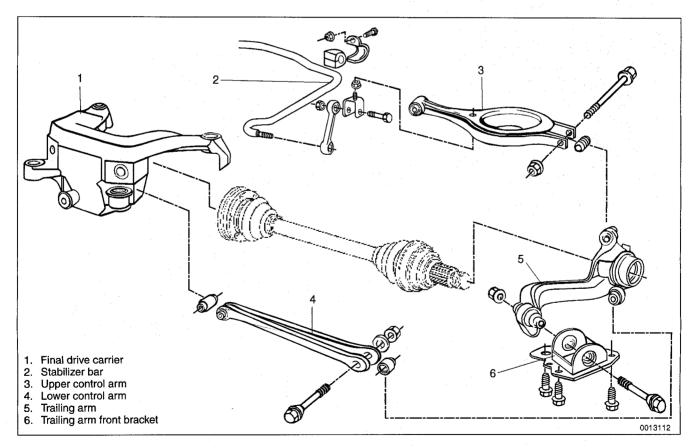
Rear trailing arms, control arms and final drive carrier.
